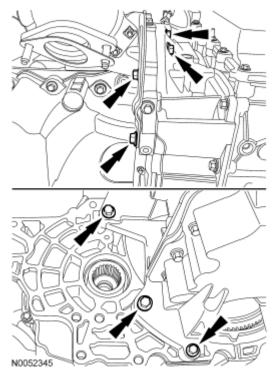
Locating torque converter housing bolts Courtesy of FORD MOTOR CO.
